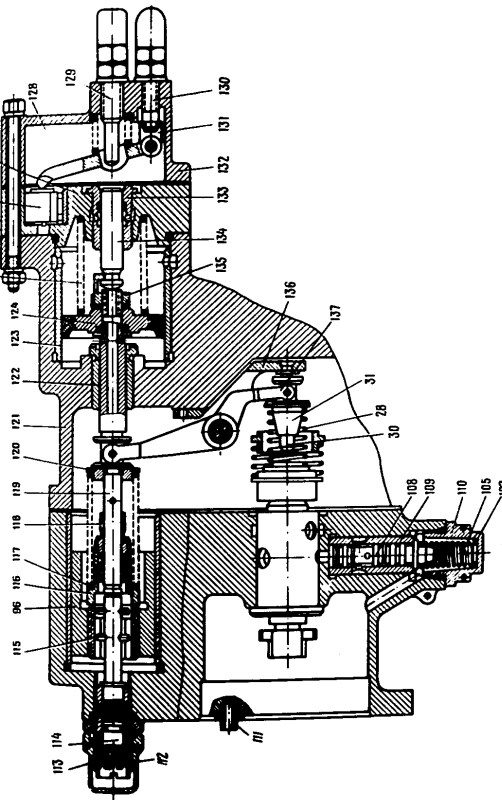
HP-10A Unit Hydraulic Decelerator and Constant Pressure Valve
